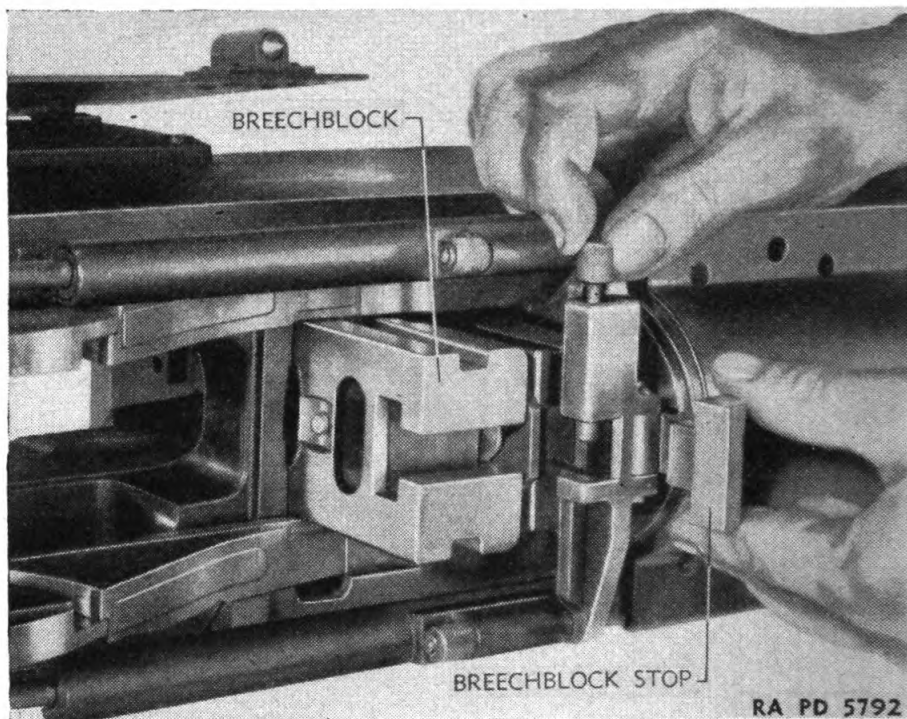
Releasing breechblock stop for removal of breechblock.
